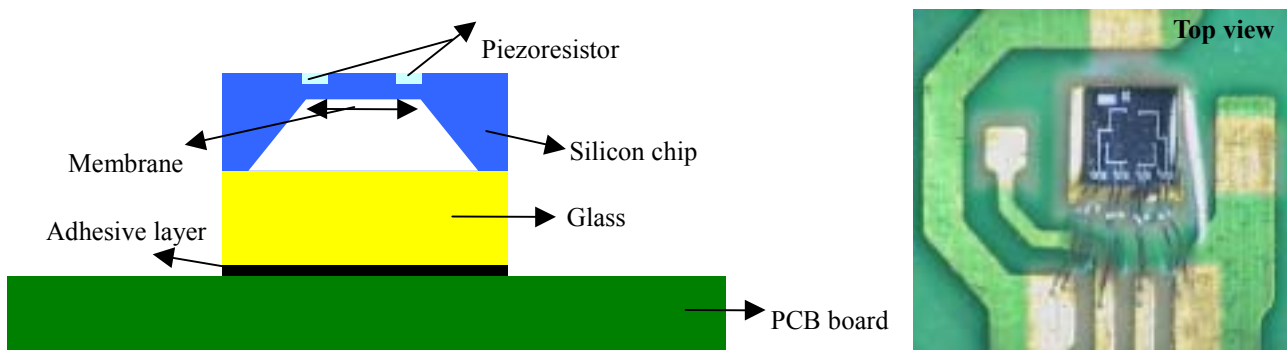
The structure cross section and top view of the packaged pressure sensor
